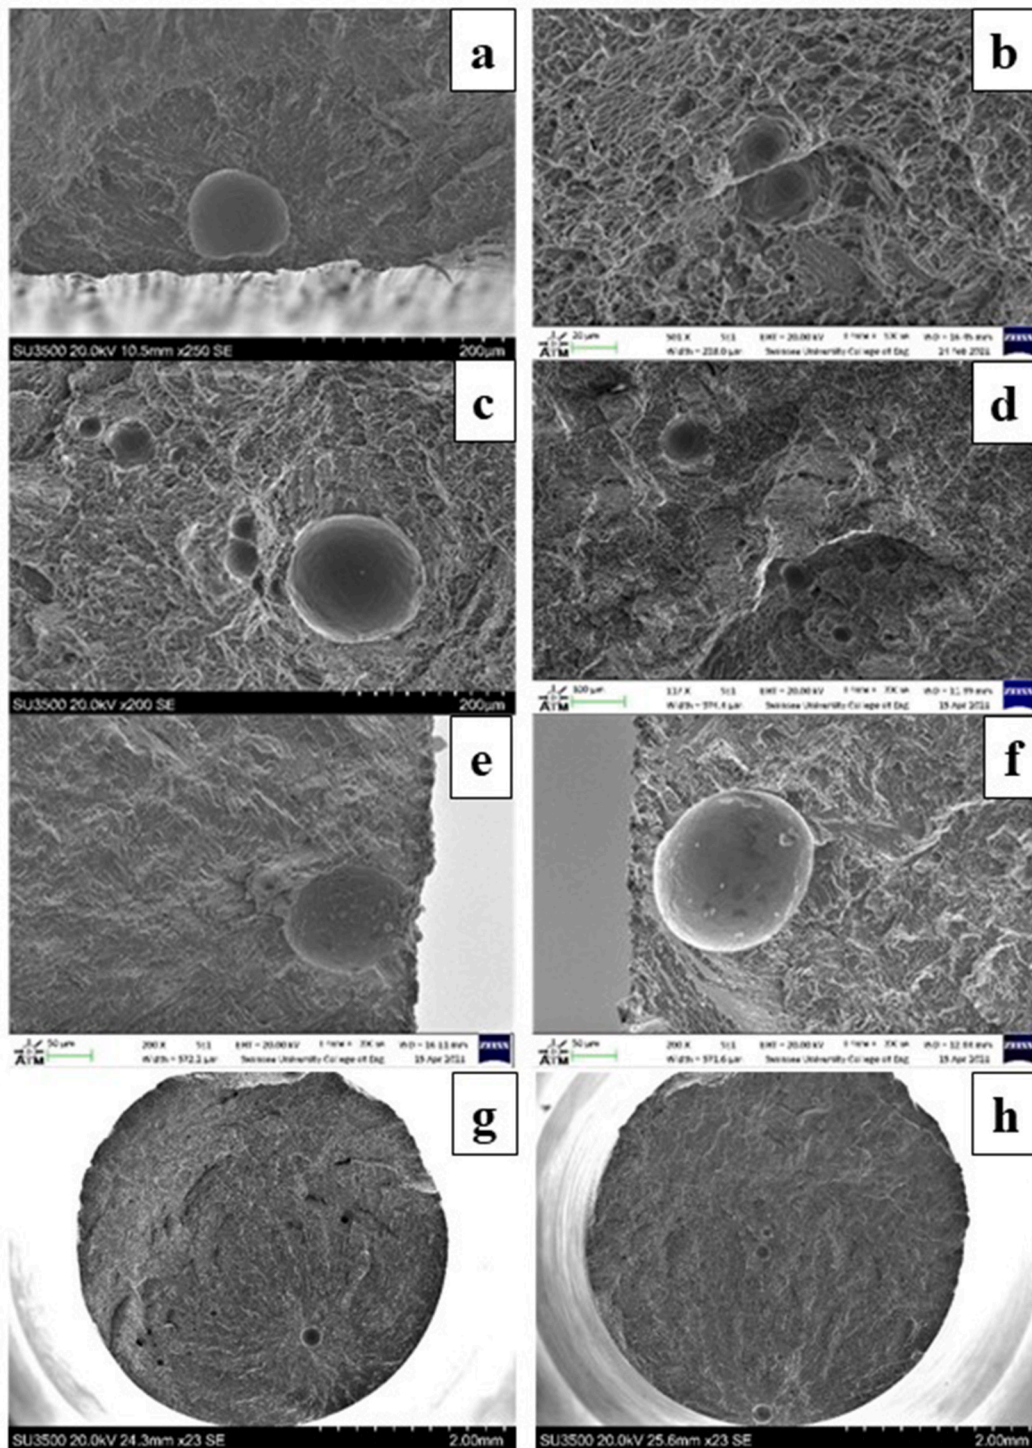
Fractographic images of LMD-w parameter set 1 Ti-6Al-4V specimens after fatigue testing a), b), c), d), e), f) horizontal machined & polished surfaces, g), h) vertical machined & polished finish.
